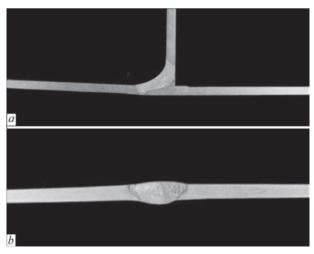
Macrostructure of T-joint (*a*) and butt joint (*b*) of 1.5 mm thickness, made by the TOPTIG method using welding parameters according to the Table
